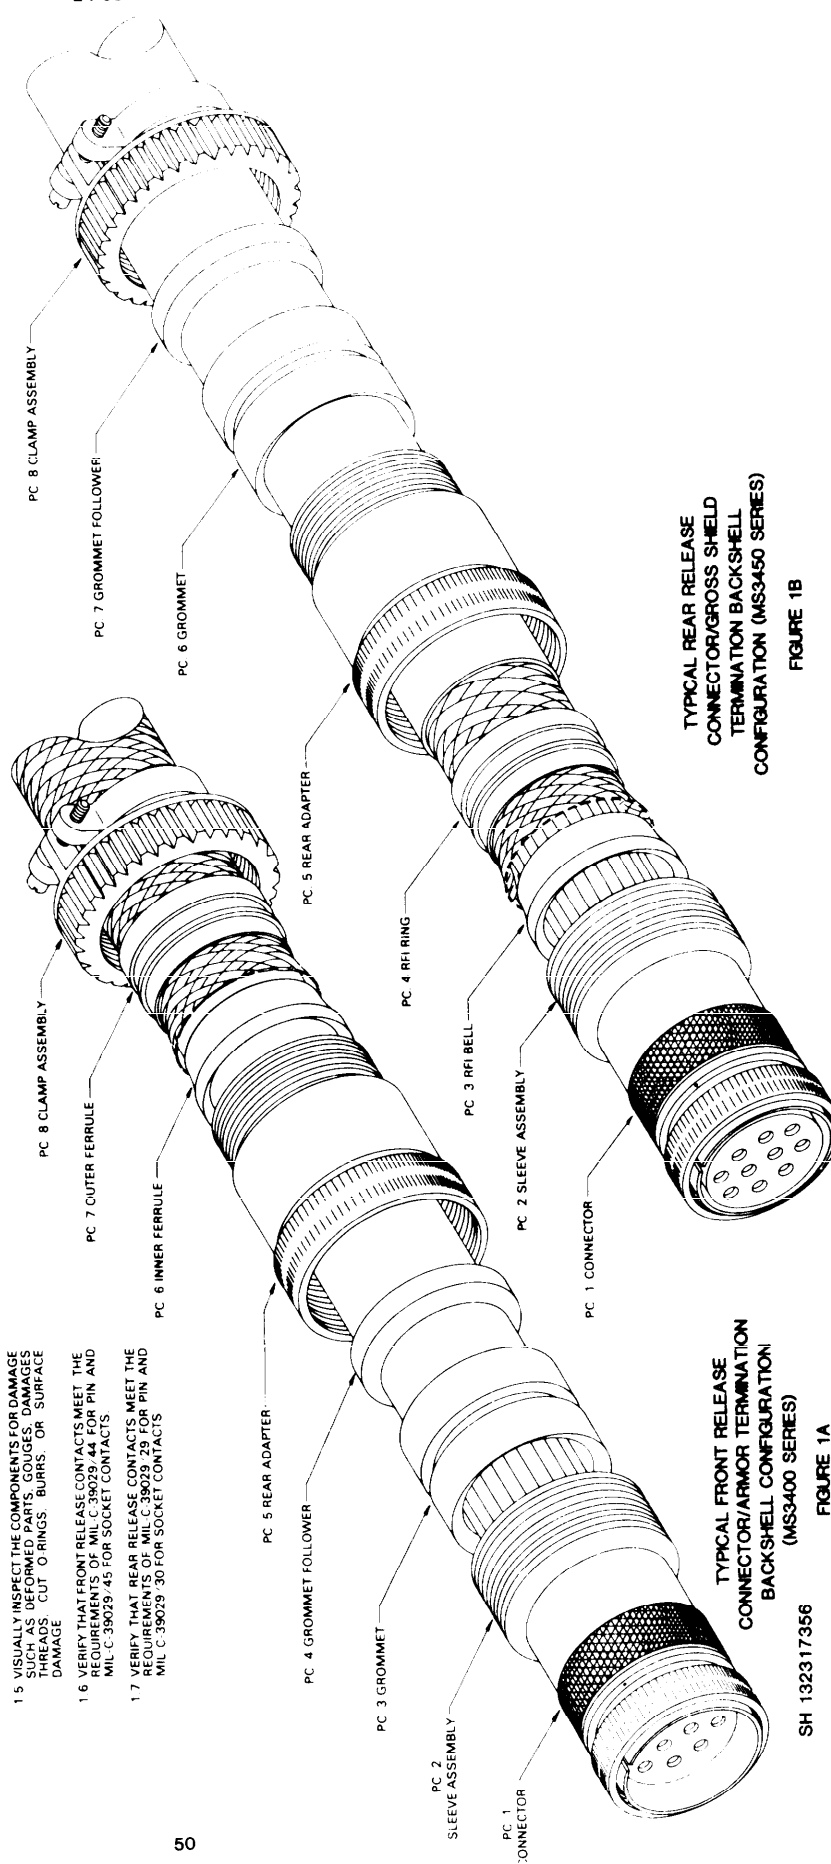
C3. MIL-C-5015 (crimp) connector assembly procedure.
